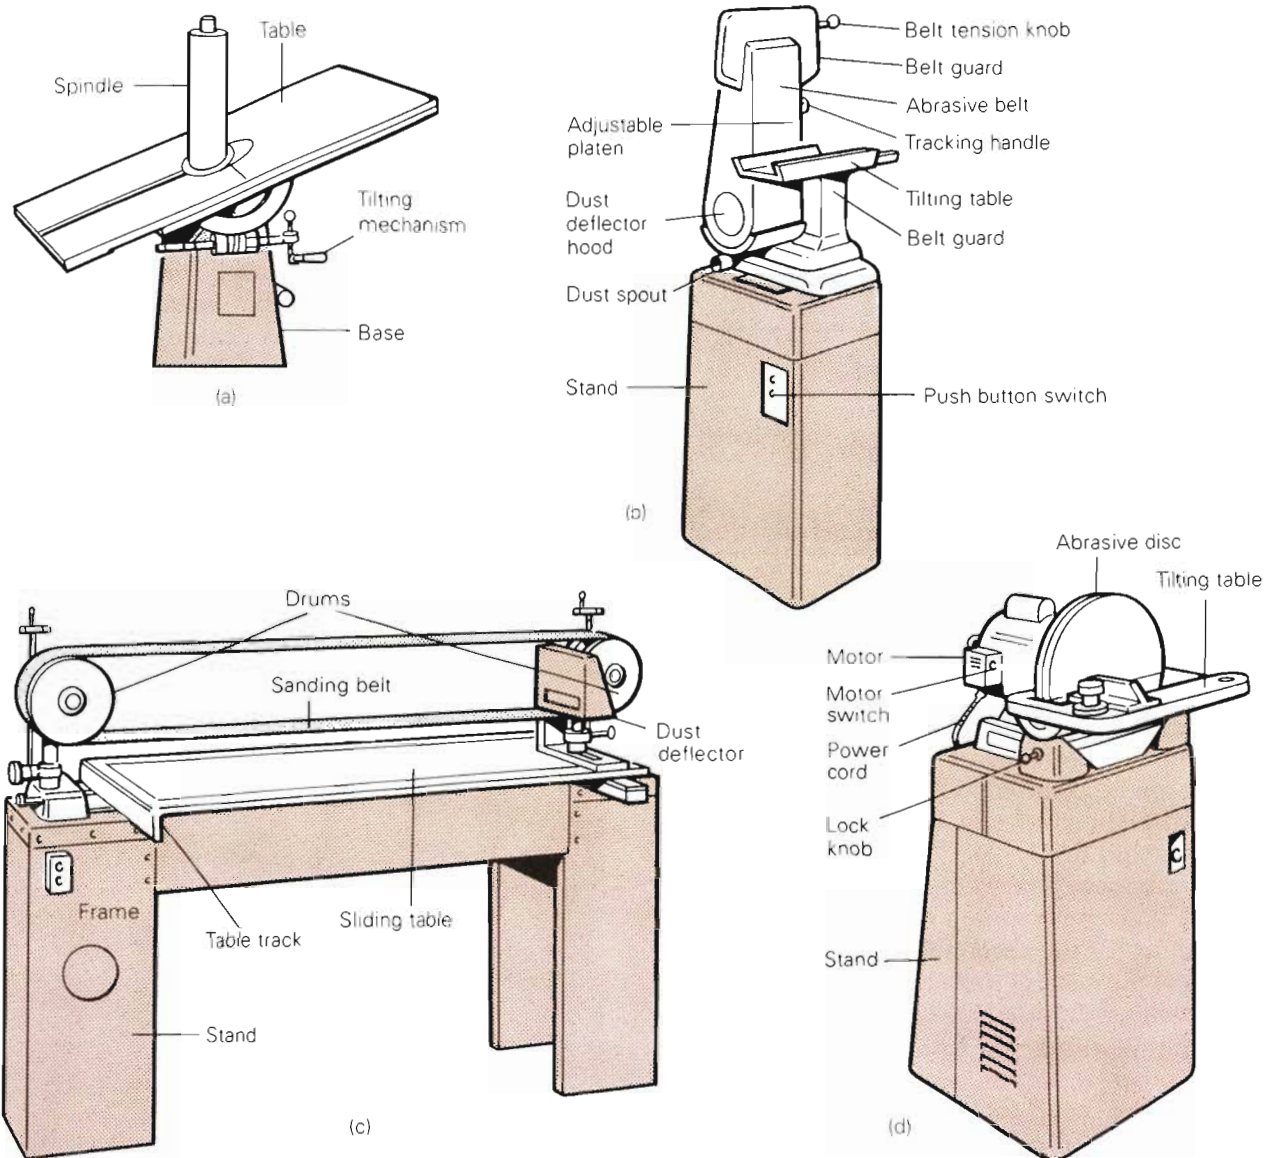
Types of sander: (a) spindle sander, (b) disc sander, (c) floor-model belt sander, (d) horizontal belt-stroke sander.
